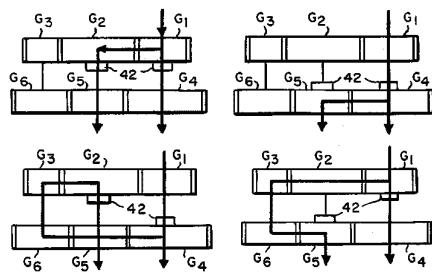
Geared drive with variable structure of Reducing Sizing Mill (RSM)
